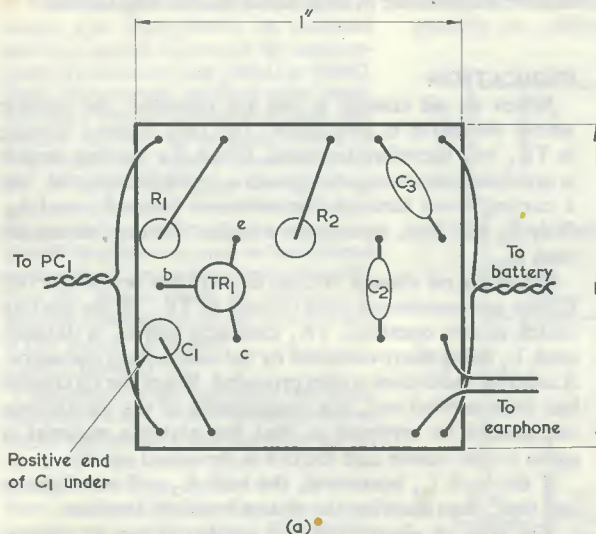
(a). The oscillator may be conveniently assembled on Cir-Kit. This view shows the components side of the board
